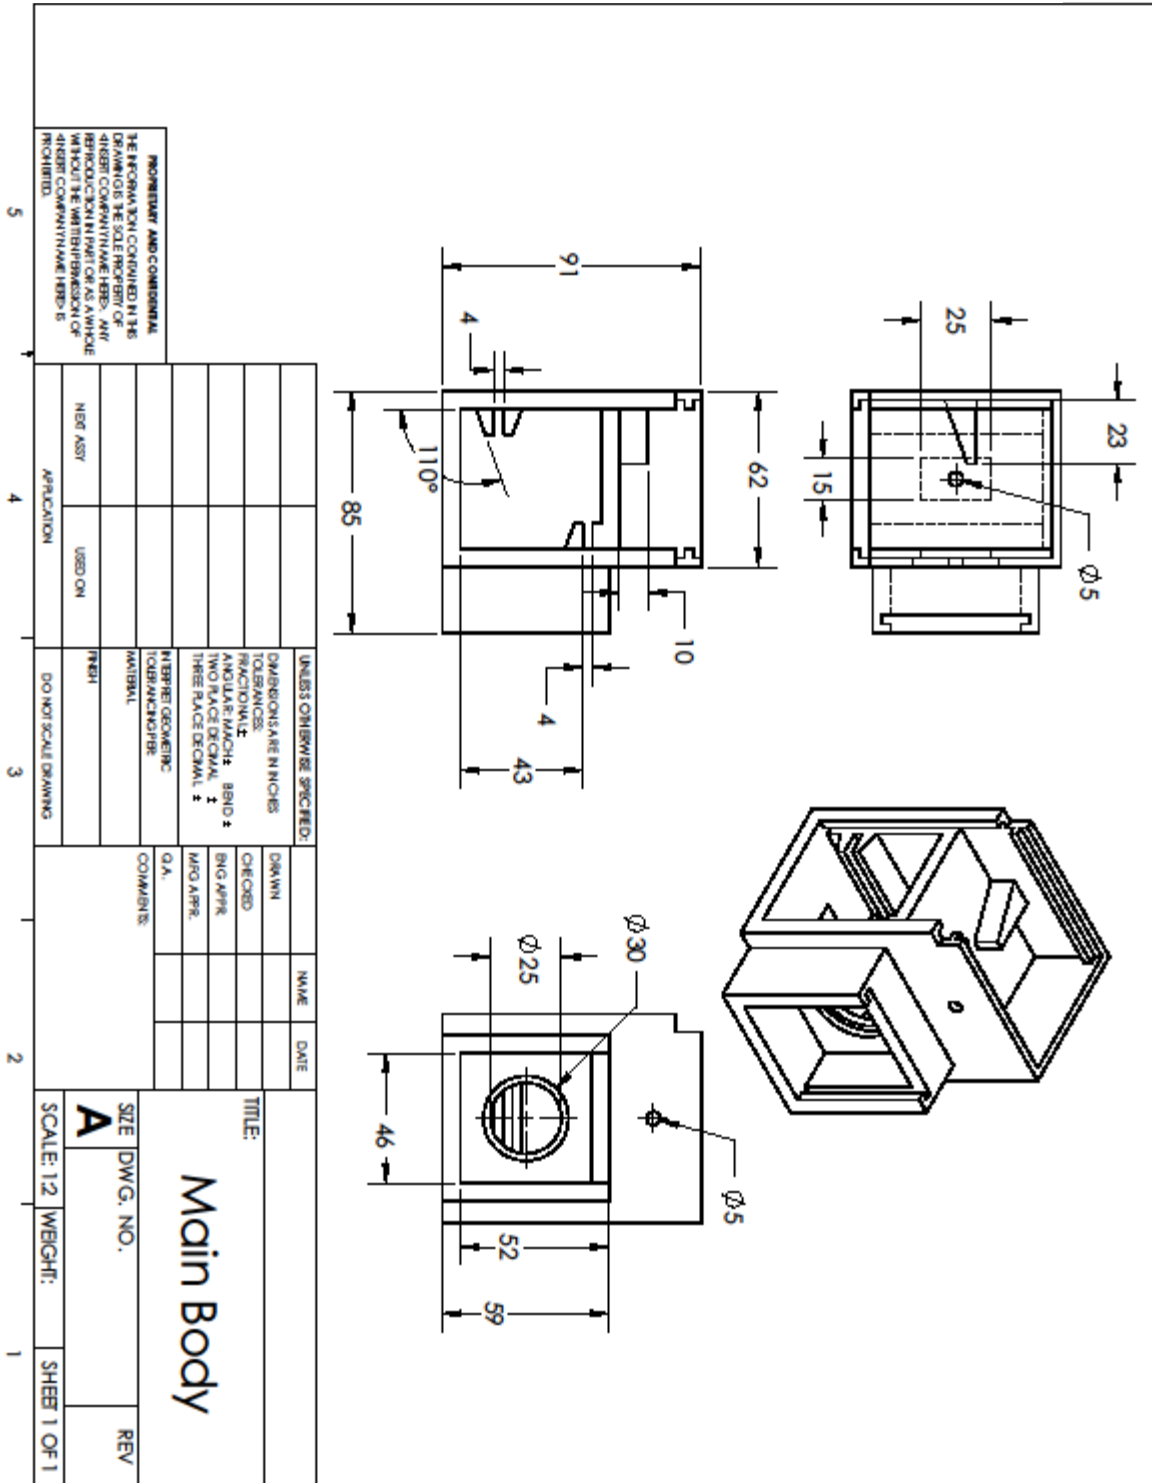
Beamsplitter Holder Drawing [mm], Part 2
